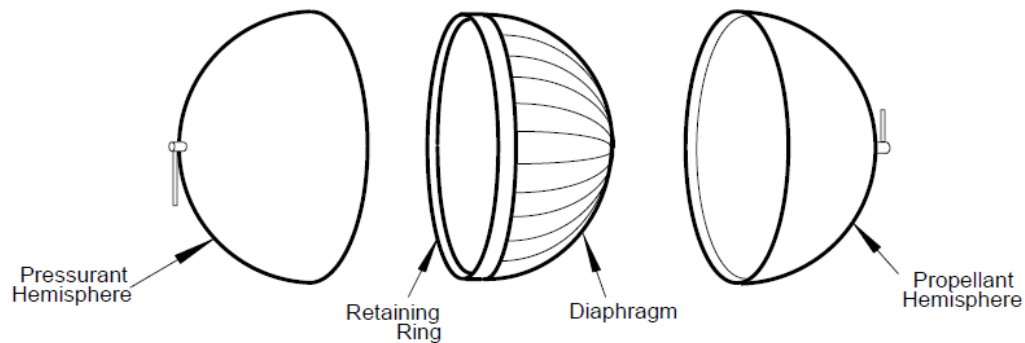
Explosion View of Typical ATK Diaphragm Tank Assembly [3]
